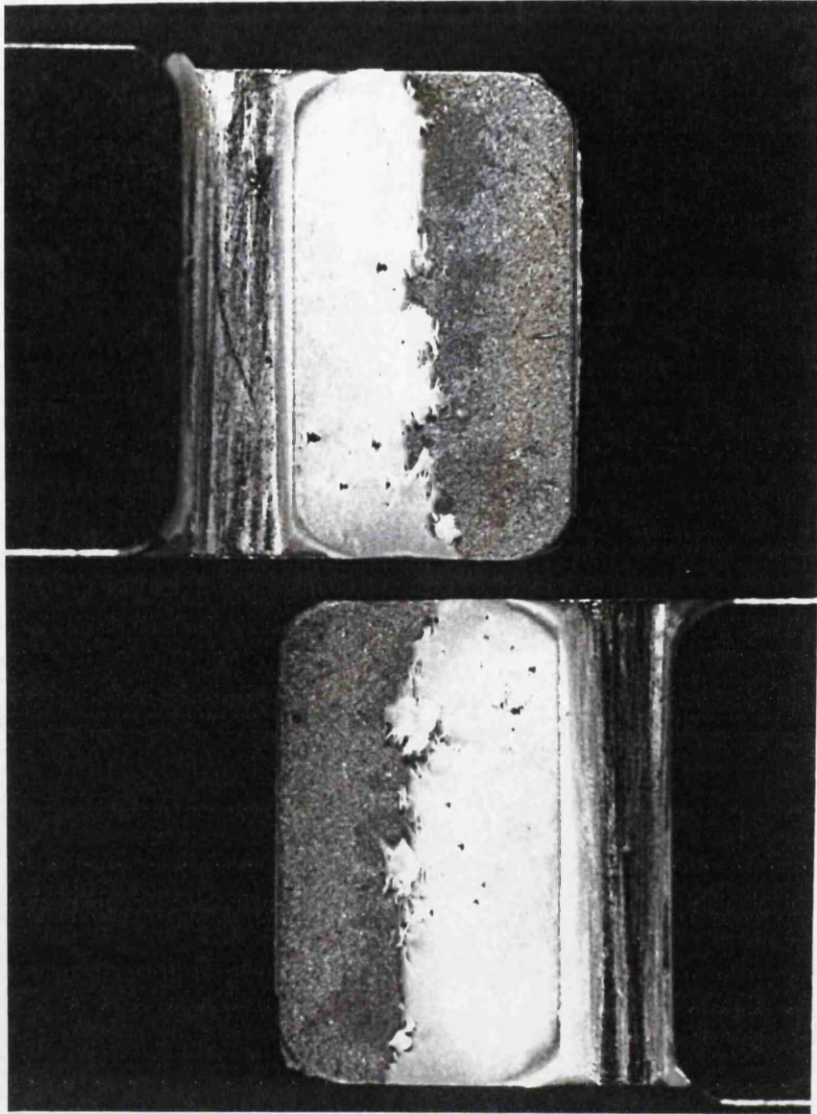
FRACTURED SURFACES OF LAP SHEAR SPECIMEN (WITH SPEW FILLET)
